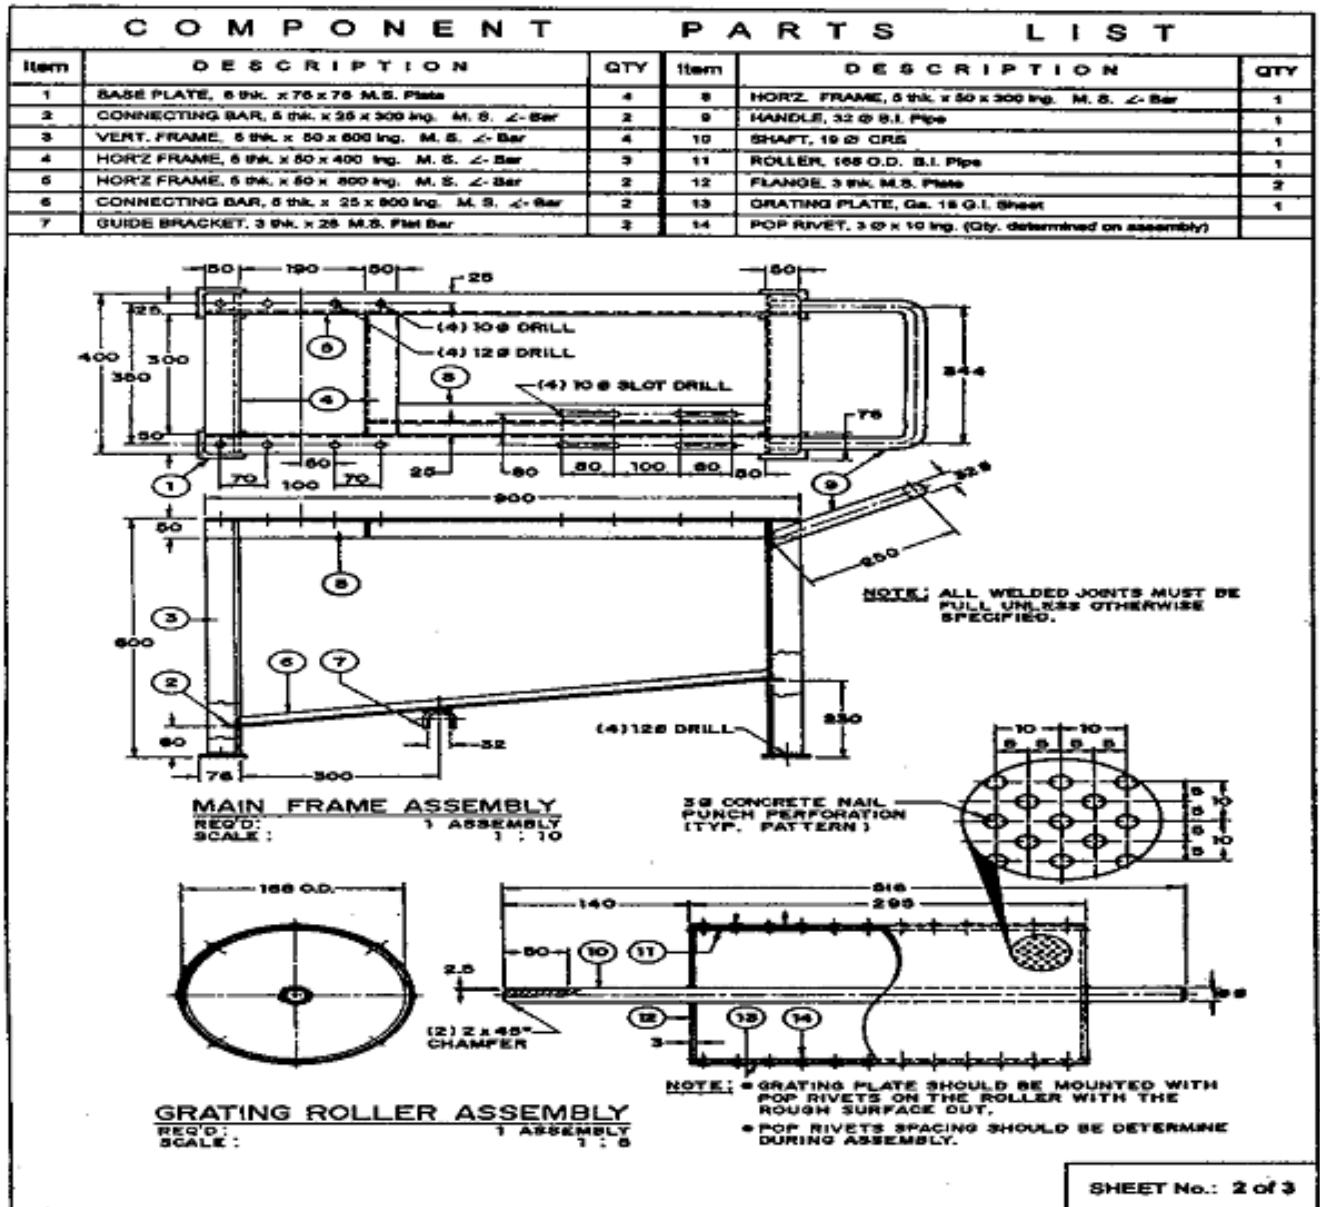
IITA 202 describing component parts and dimensions and how grating plate should be mounted
